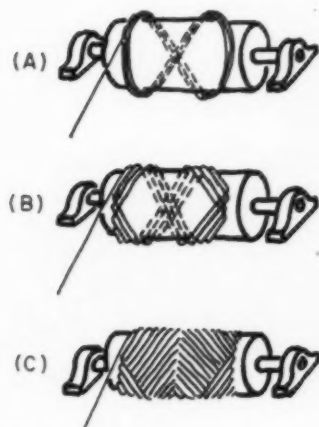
(A) Drawing of filament buildup on winding mandrel with an exact integral ratio; (B) shows a non-integral winding ratio mandrel winding pattern partly wound; (C) which is same as (B), showing mandrel fully wound.
